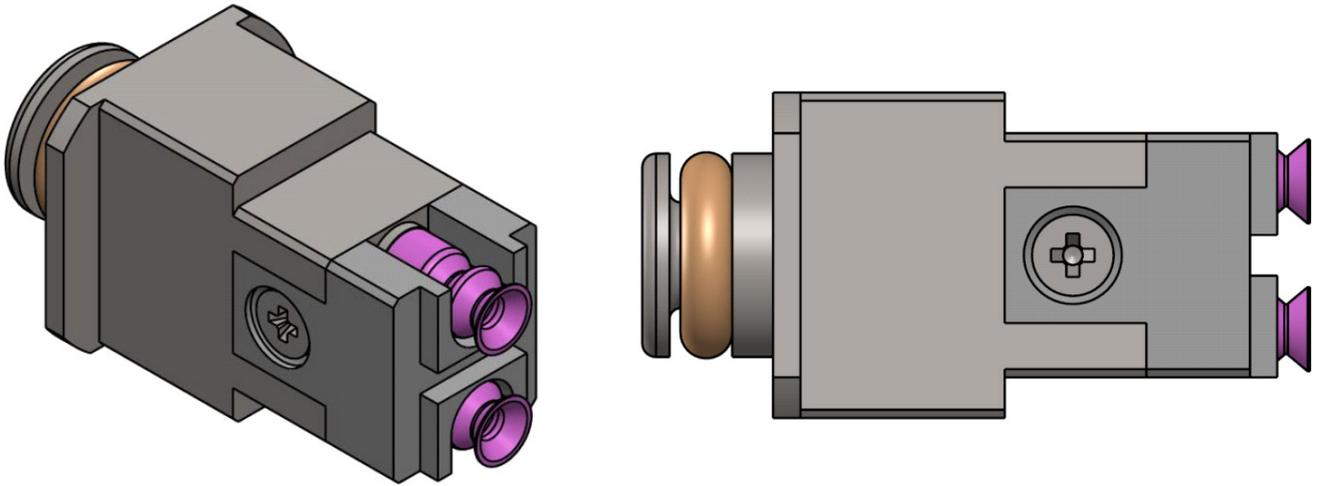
Suggested Power Tower Pickup Tool – 3D and Side View
